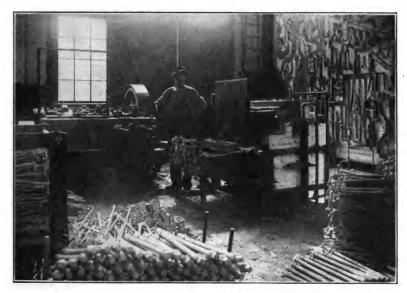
ANOTHER BATCH OF FORGINGS TURNED OUT BY THE TWO-INCH MACHINE
